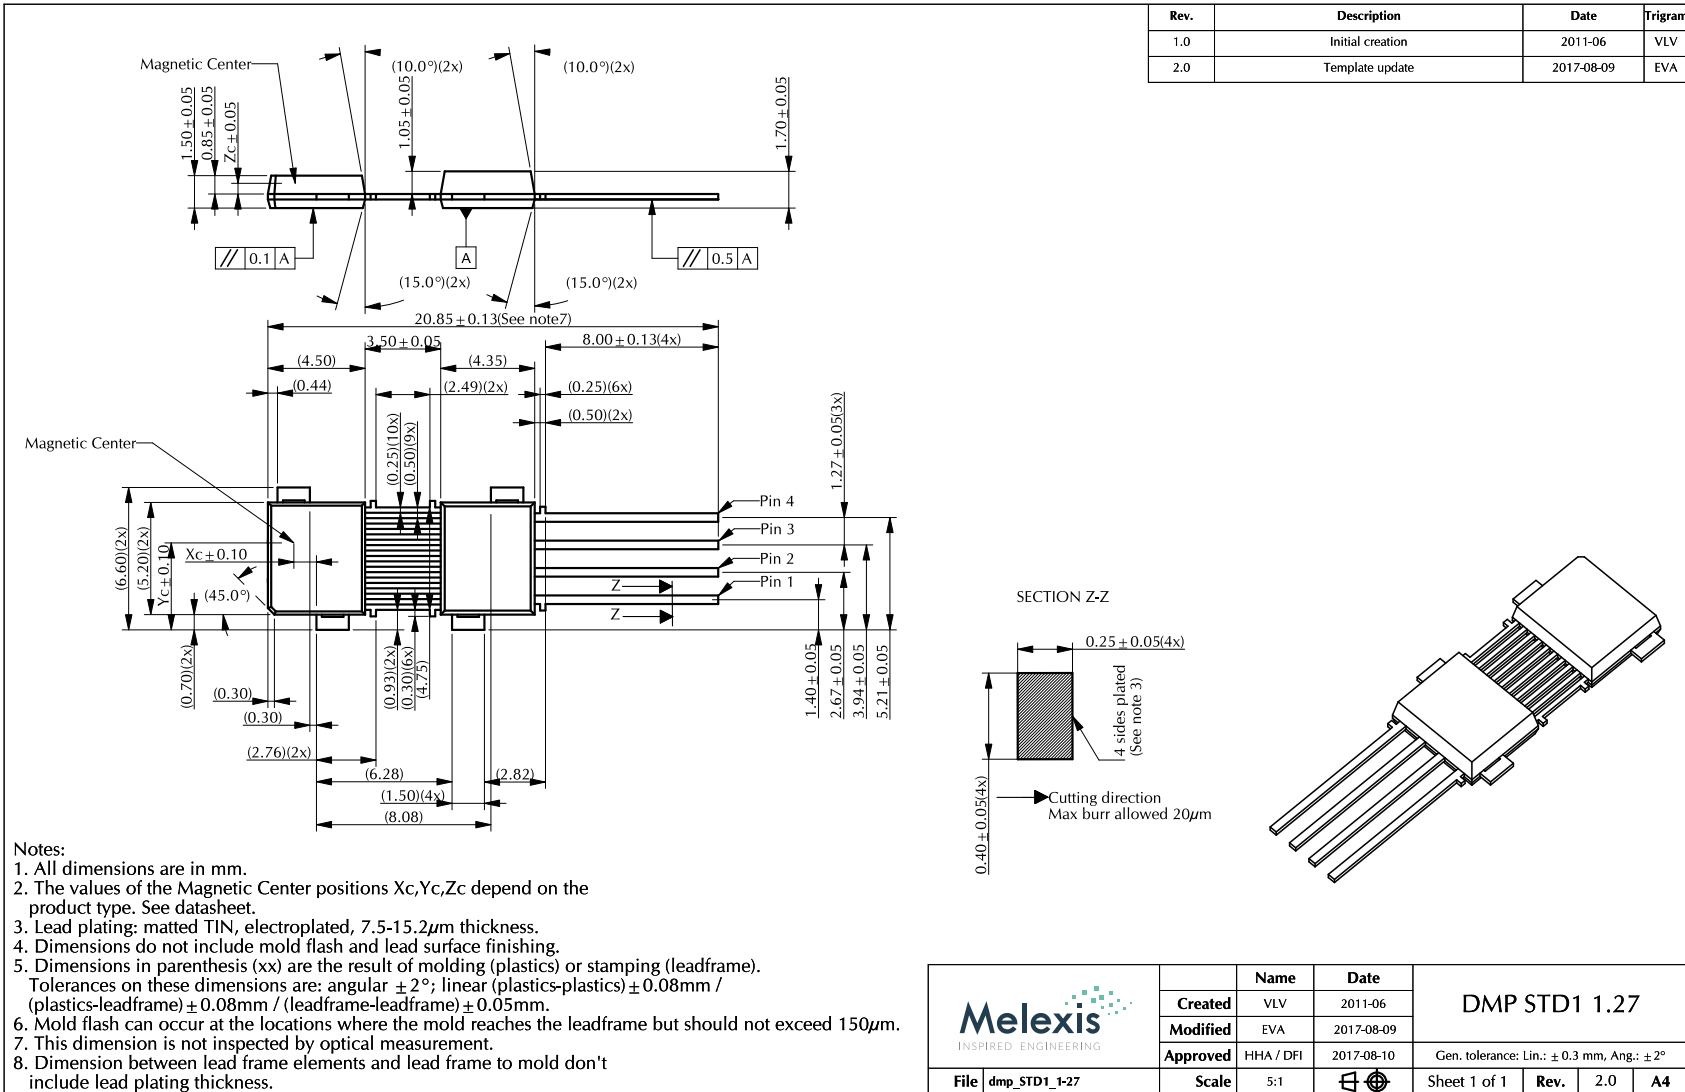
DMP-4 Straight Leads Package Outline Drawing
